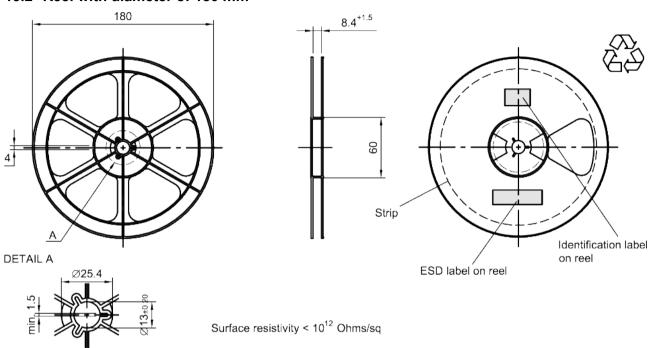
Drawing of reel (first-angle projection) with diameter of 180 mm.
